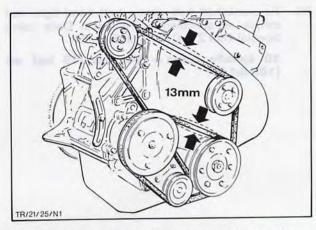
Adjust alternator and vacuum pump V-belt tension
